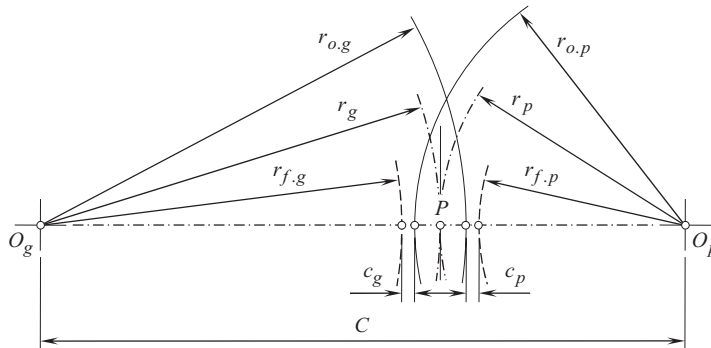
Radial clearance in parallel-axes involute gear pair.
